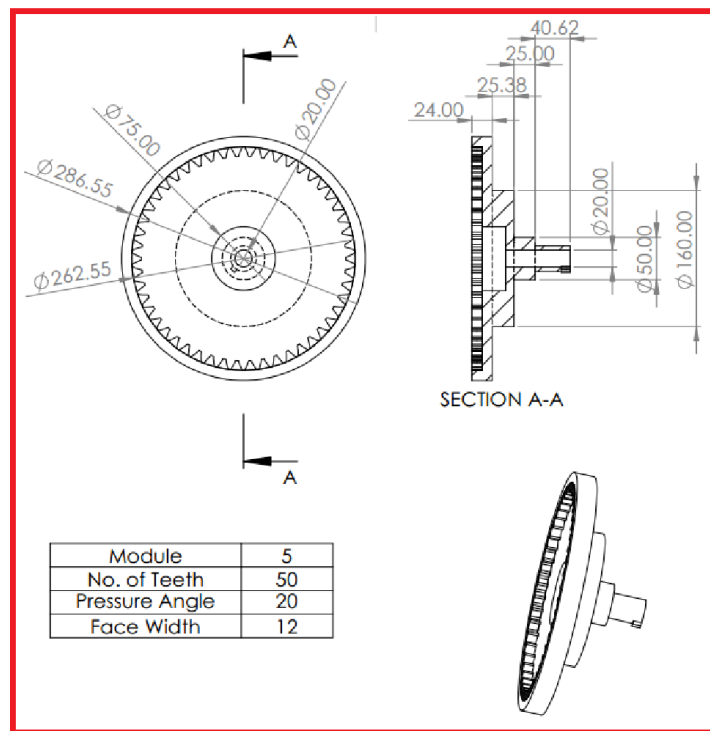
Spur\_Gear\_1 Geometry and Dimensions (mm)
